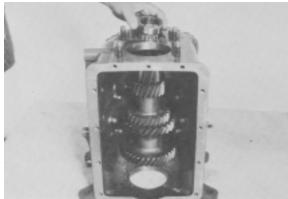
Turn transmission case on end as shown. Position countershaft assembly into front bearing cup. Install rear bearing cup over rear taper bearing, tap cup into place.
